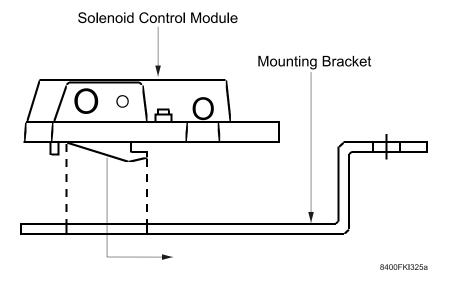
Solenoid Control Module / Mounting Bracket Assembly
